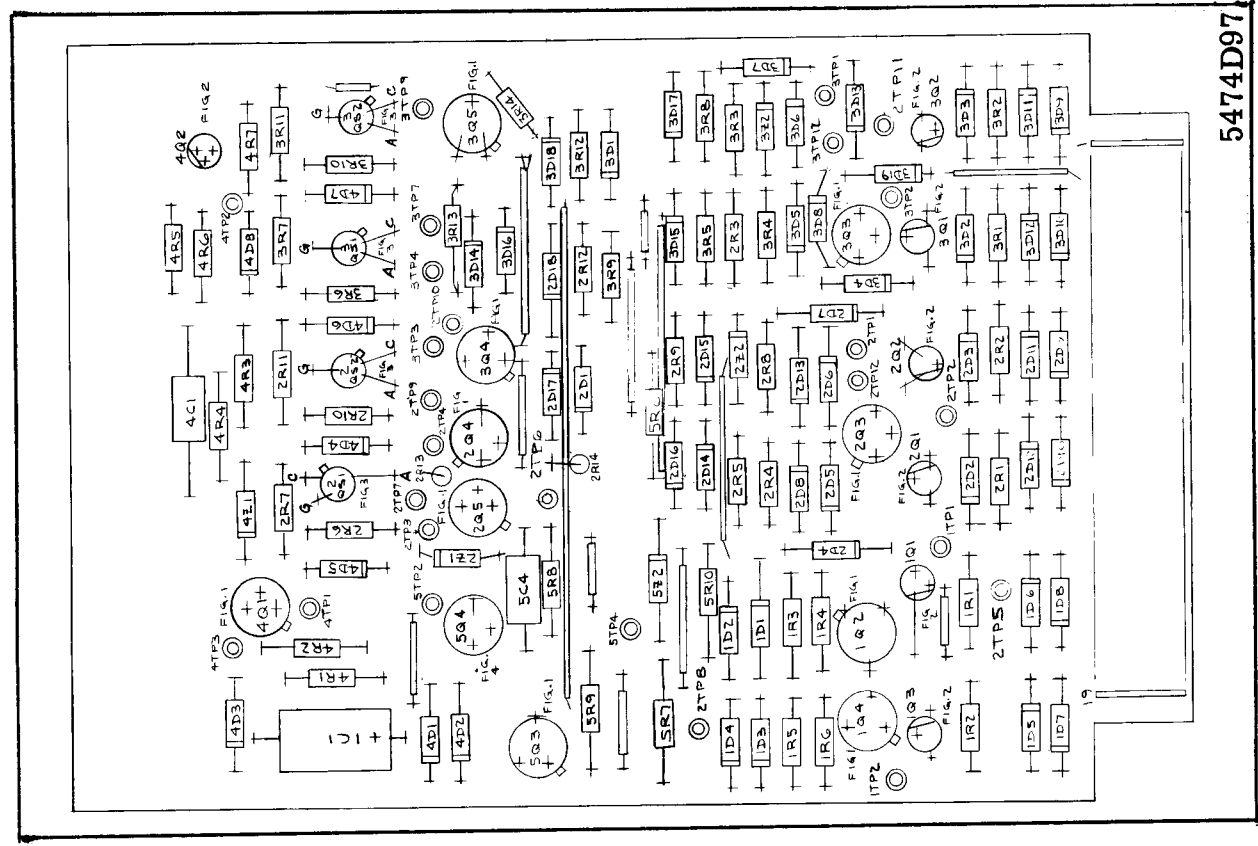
Main Printed Circuit Board Assembly for Type SKD Relay.
